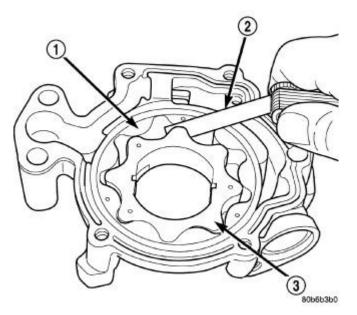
Measuring Clearance Between Rotors Courtesy of CHRYSLER LLC
